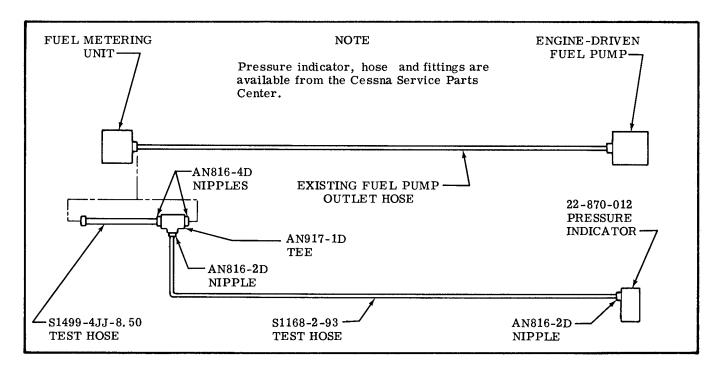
A-4. Fuel Injection Pump Adjustment Test Harness
